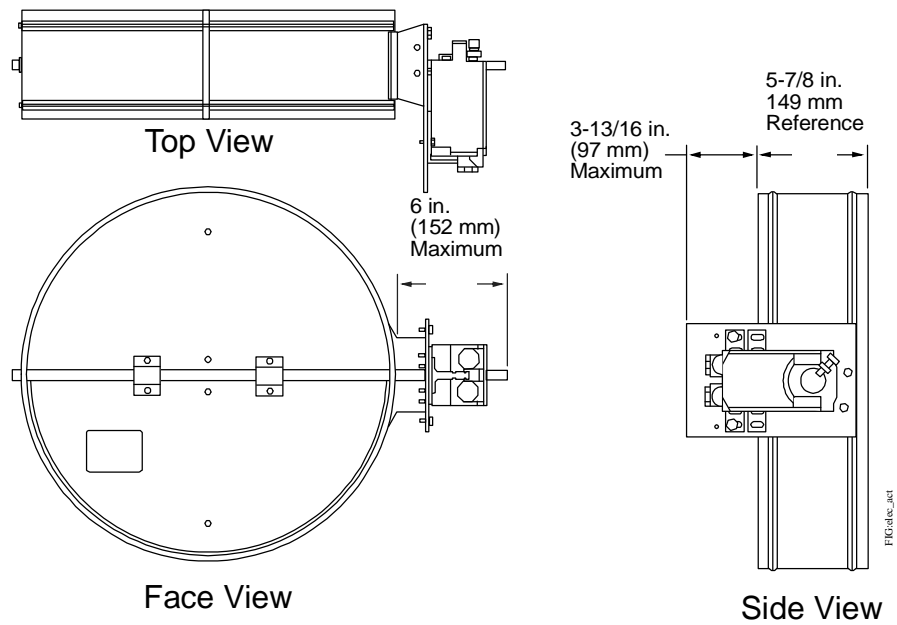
Damper with Electric Actuator Dimensions, in. (mm)
